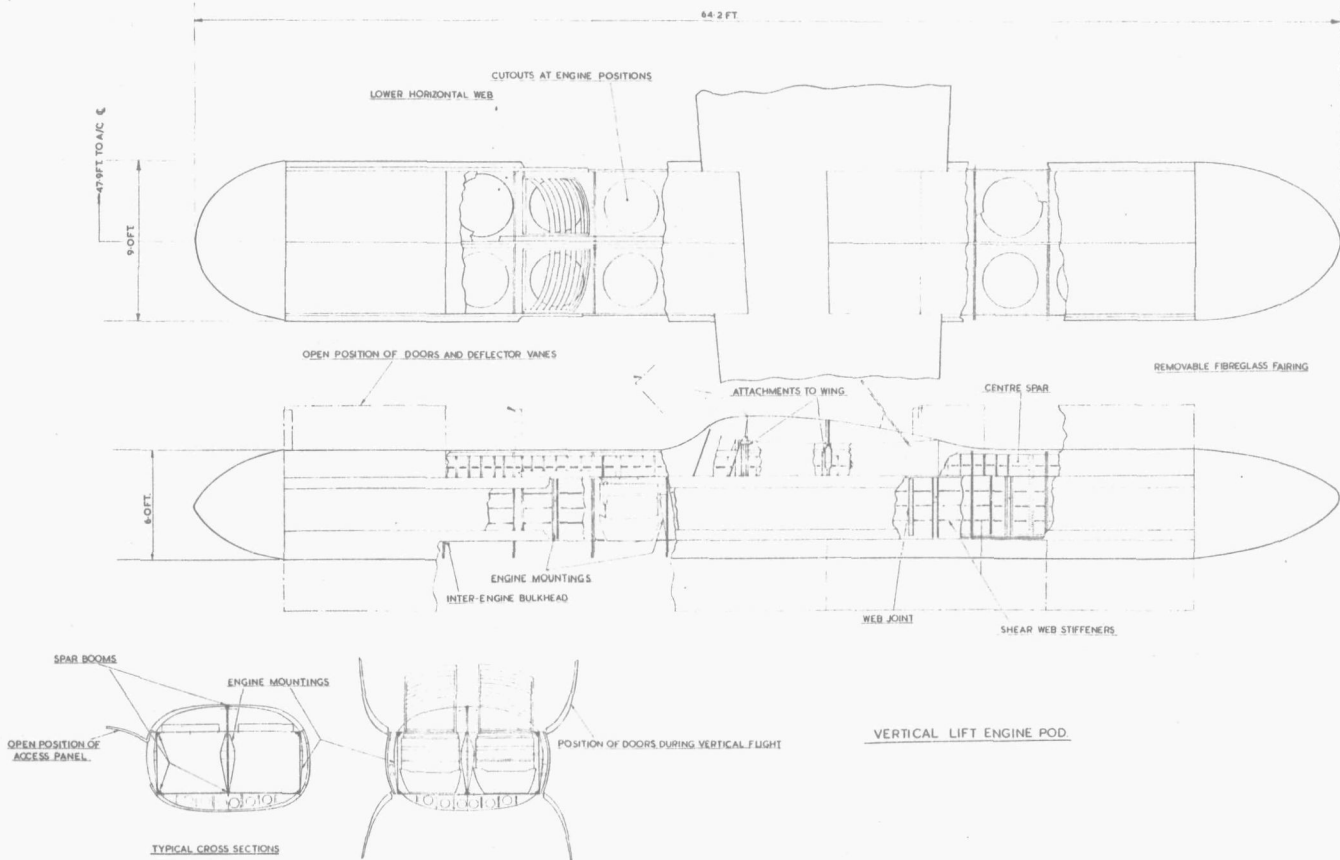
V.T.O.L. POD STRUCTURE AND INSTALLATION
